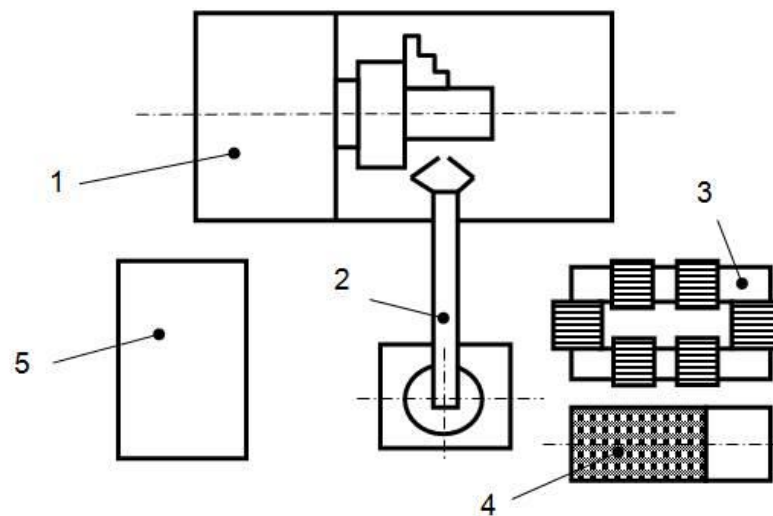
Diagram of a single-stand RTC layout with a floor covering: 1 – machine tool, 2 – floor robot, 3 – storage of blanks and finished parts, 4 – tool shop, 5 – RTC control system.
